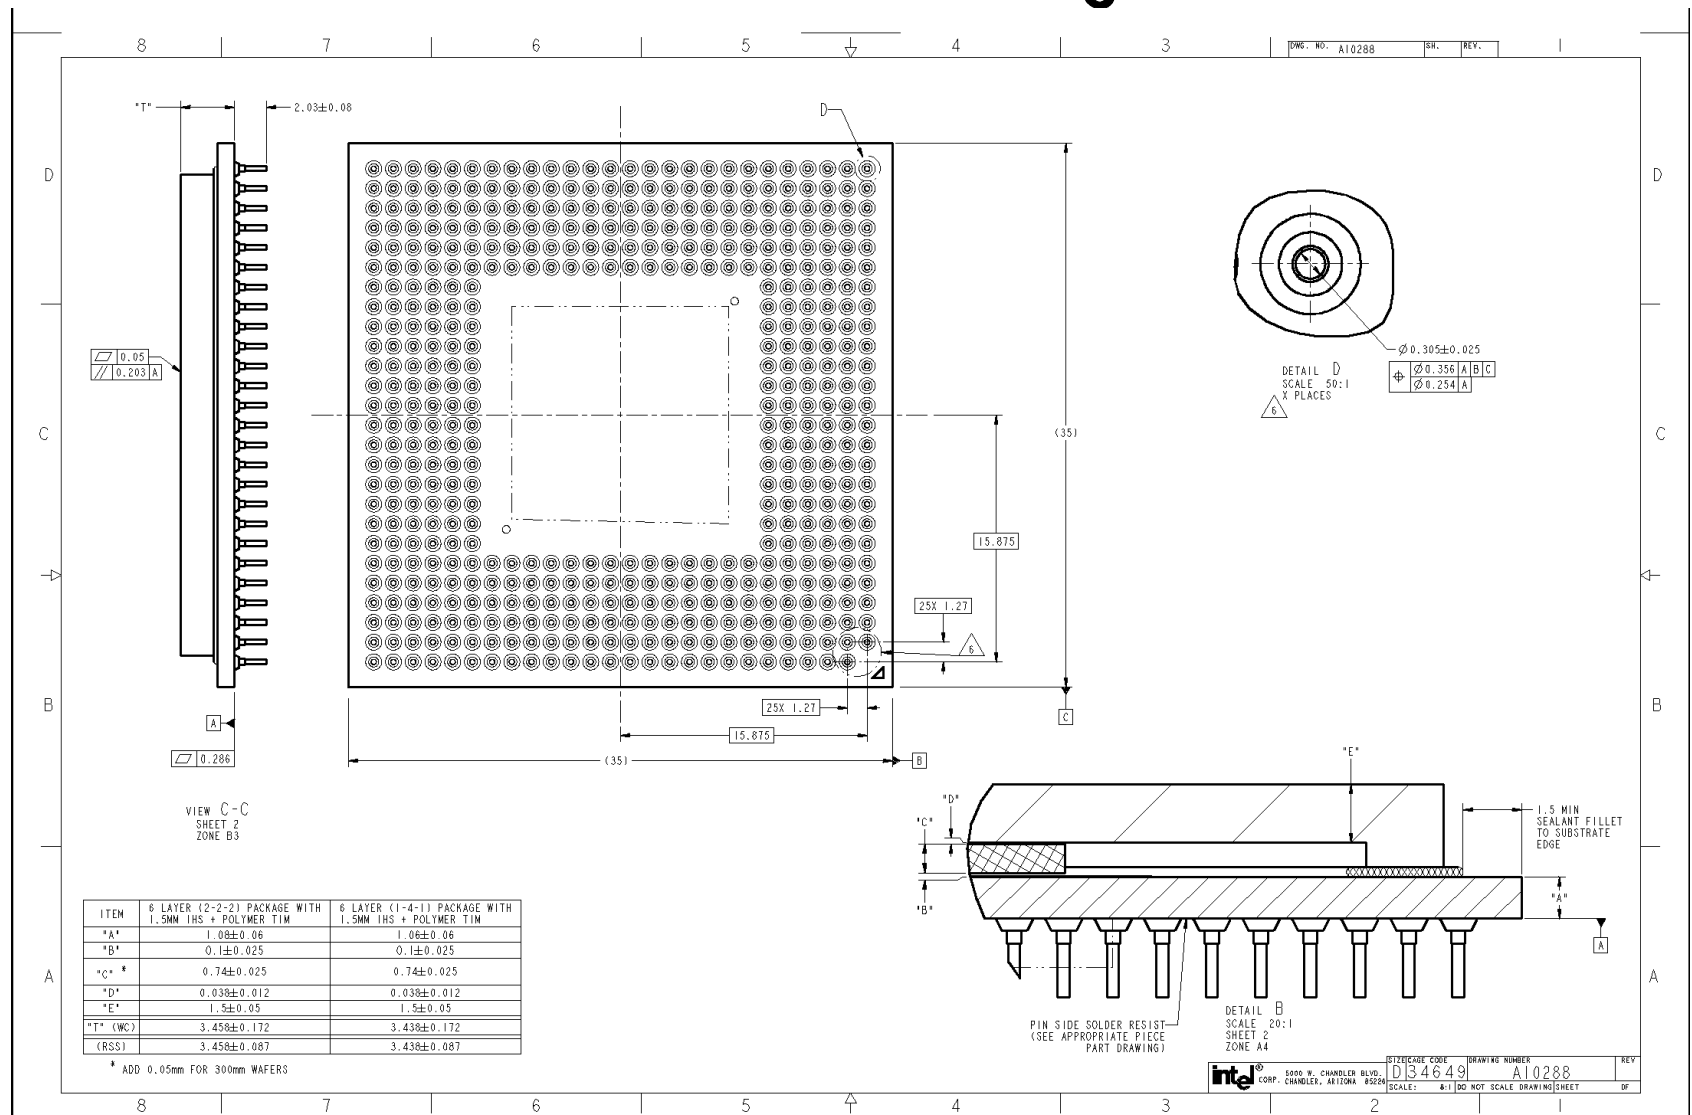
478-Pin FC-PGA Package (Bottom View)
